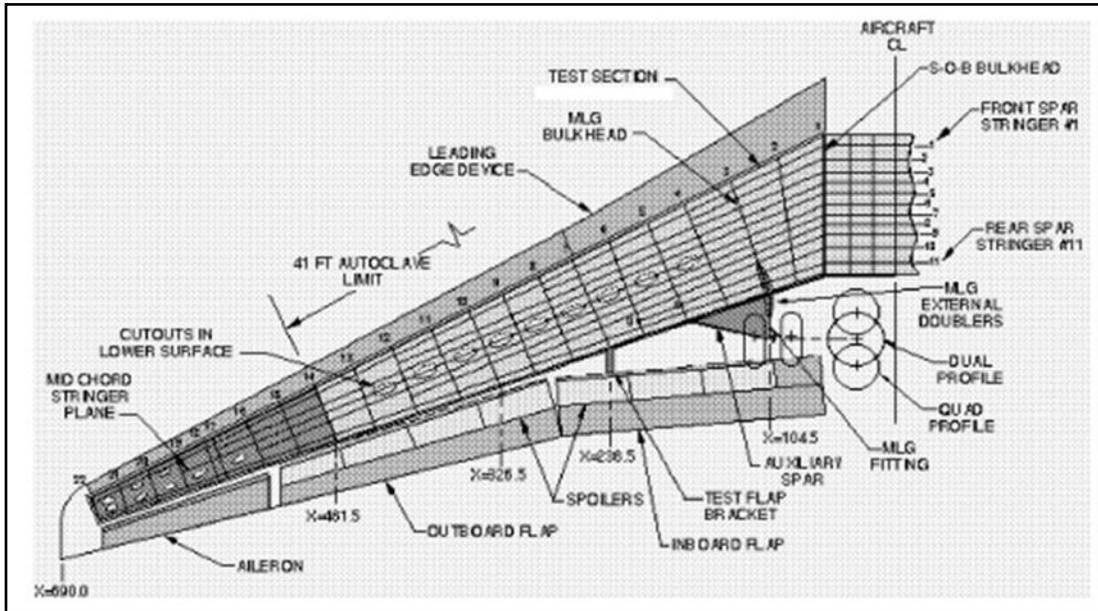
Full-scale MD-90-40X Wing Structural Arrangement
